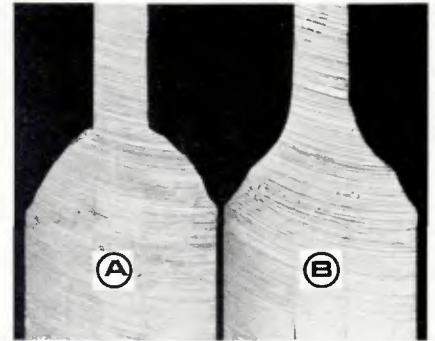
Weld bead profiles of (A) undressed and (B) dressed fillet welds
